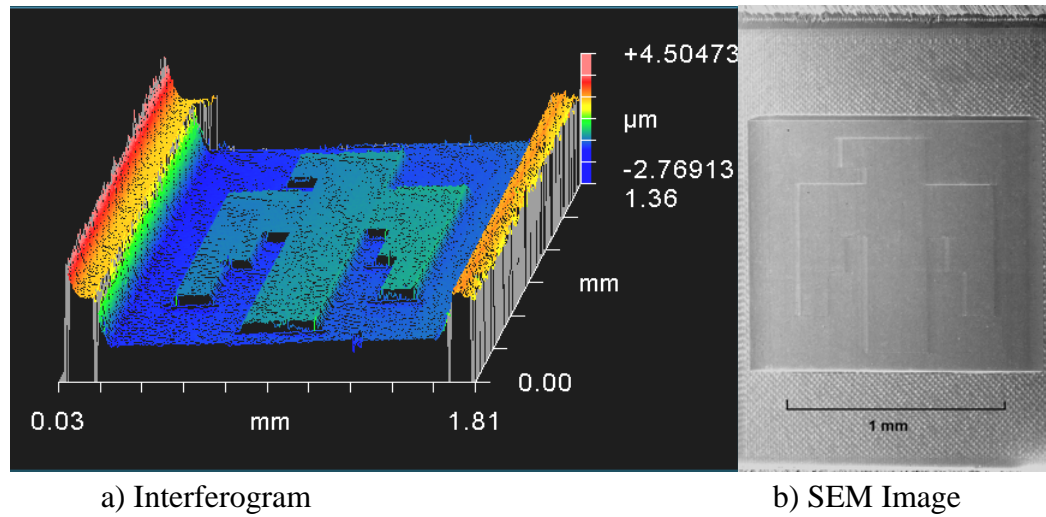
Thunderbird Machined in 17-4PH Stainless Steel
